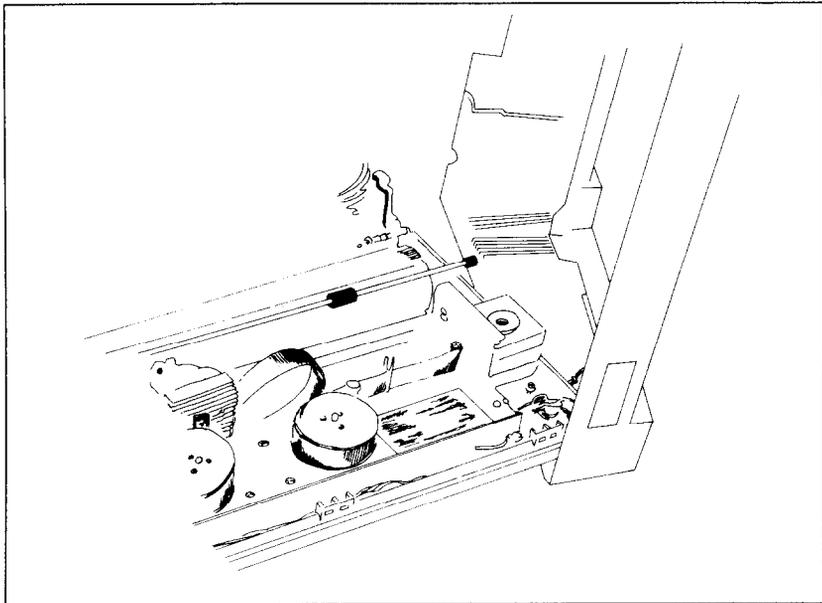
To remove Delta's upper case, remove the screws.
